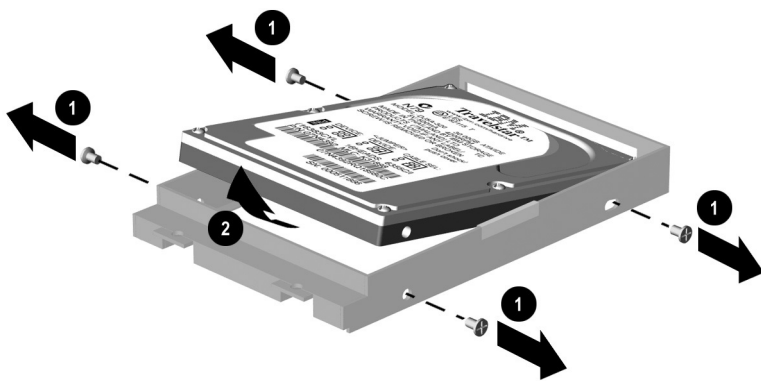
Removing the Hard Drive from the Hard Drive Bracket
